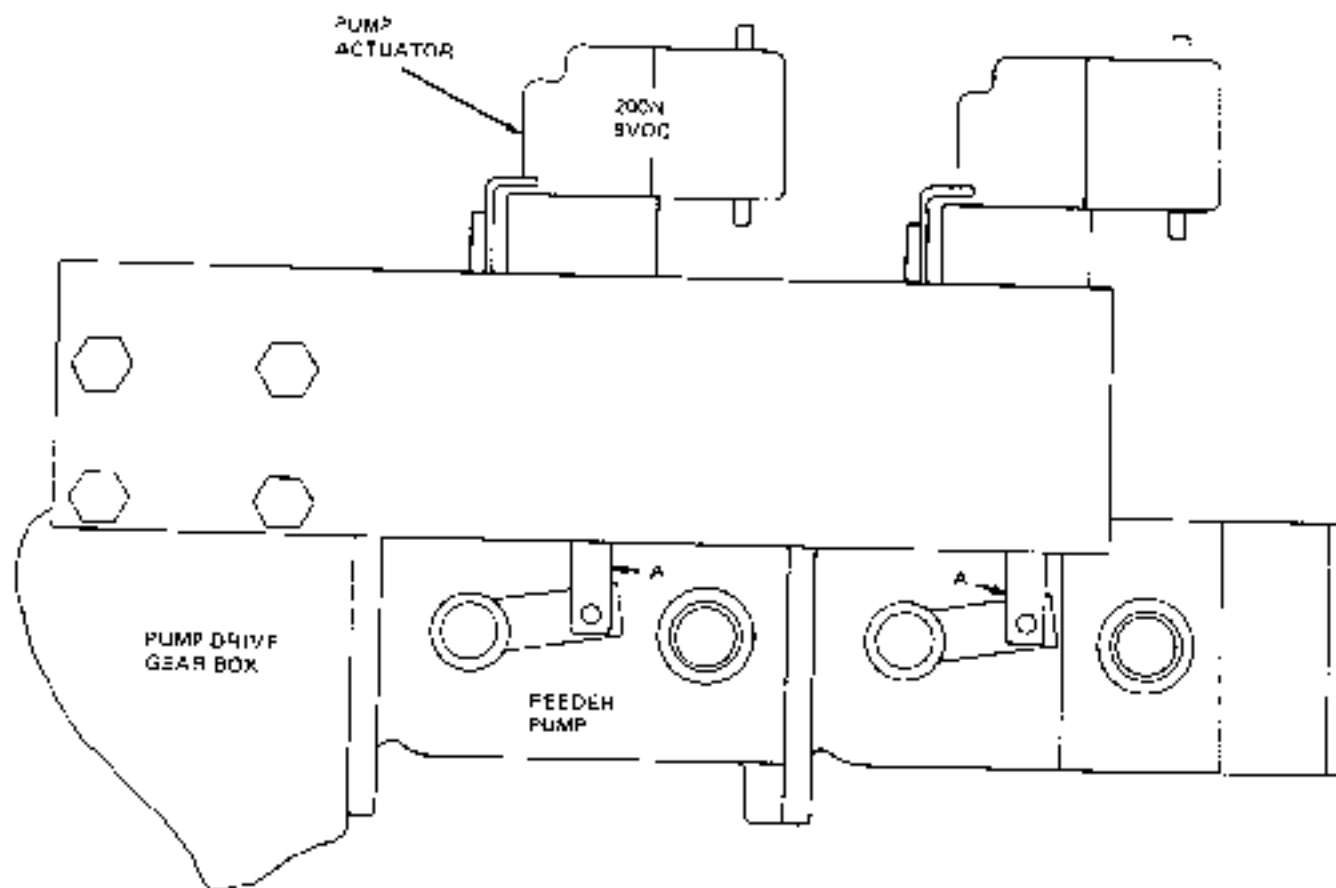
Hydraulic Feeder Stroke Adjustment
